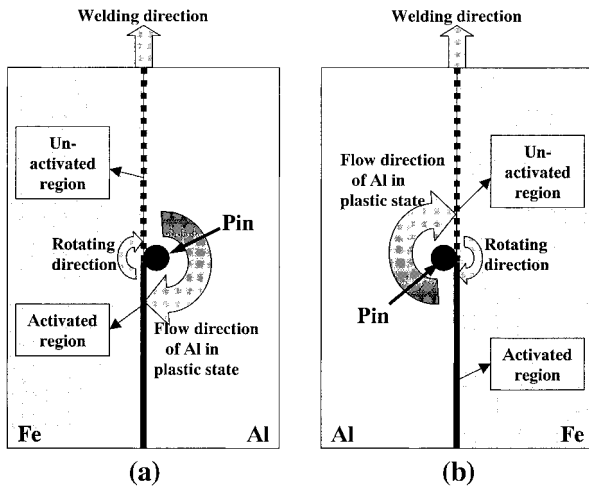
Schematic illustration explaining the reason why the counterclockwise rotation of a pin cannot weld aluminum to steel: (a) Clockwise rotation of a pin and (b) counterclockwise rotation of a pin.
